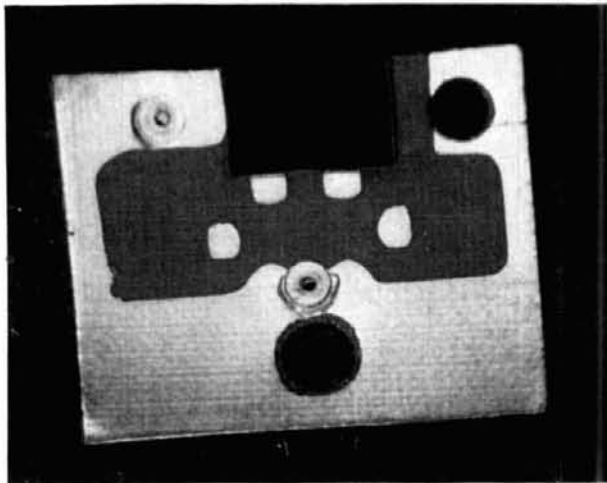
Location of parts on PC board. "Hairpin" is mounted over hairpin cutout. 240-ohm resistor is mounted above hairpin head inside outline of PC board.
